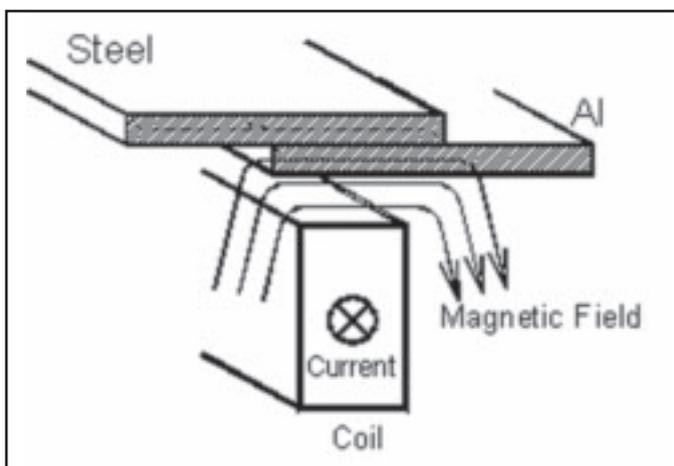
Principle of MPW for welding of the Al/steel sheet sample (cross-section view).
